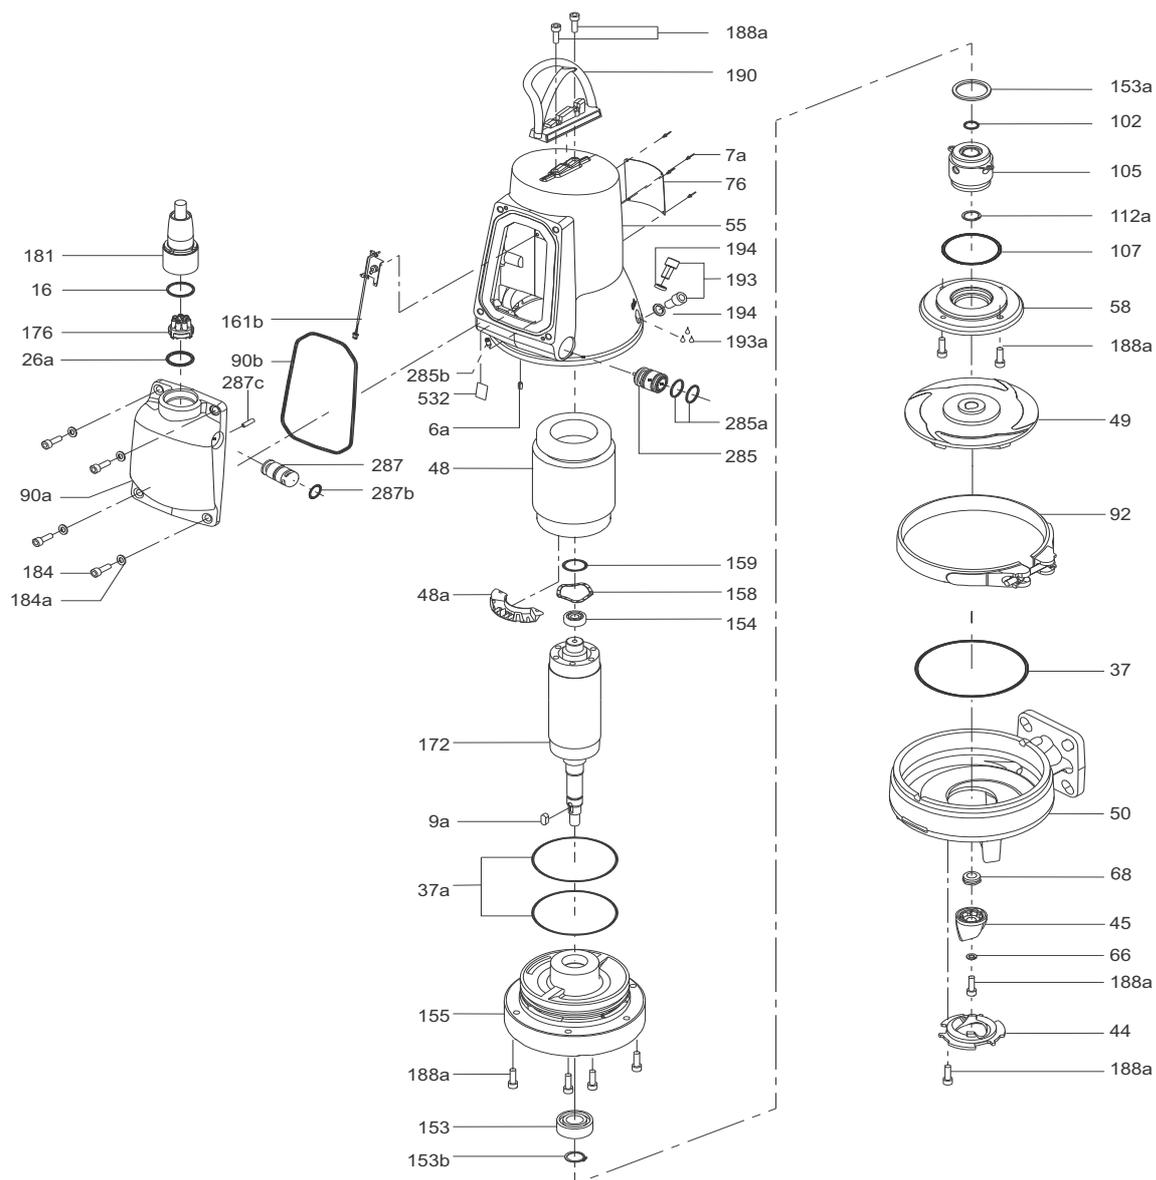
Exploded view of SEG AUTO_{ADAPT} pumps, 2.6, 3.1 and 4.0 kW
